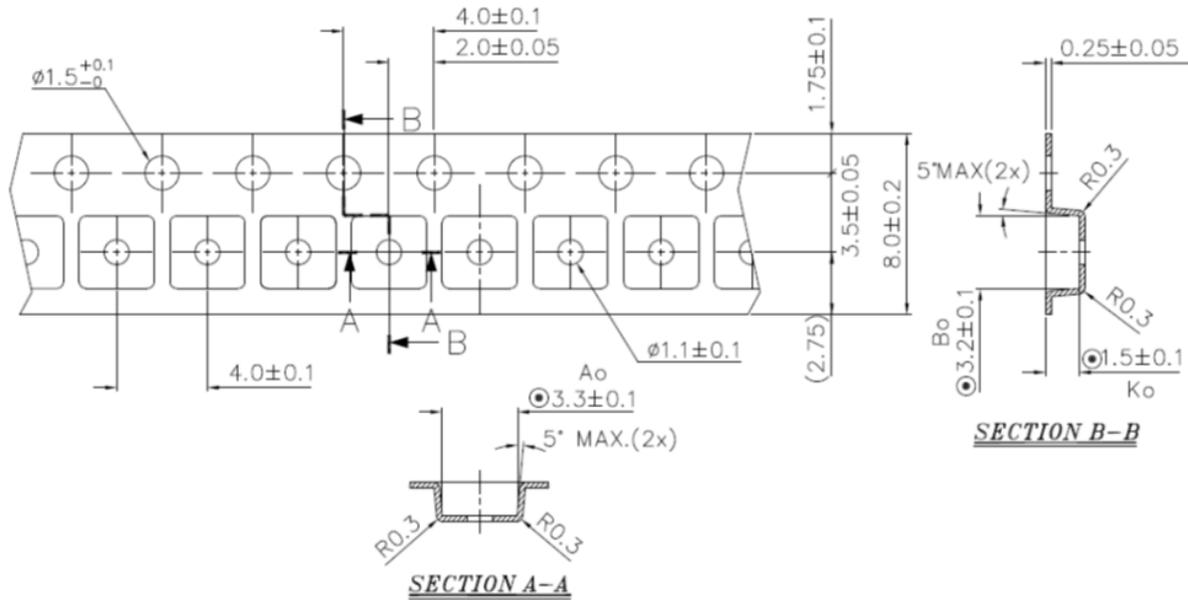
Tape and Pocket Drawing for LGA-4 Package
